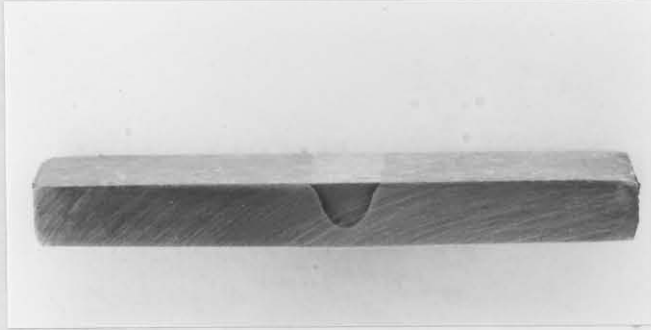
Bead-on-plate three point face bend specimen with the weld bead removed.
